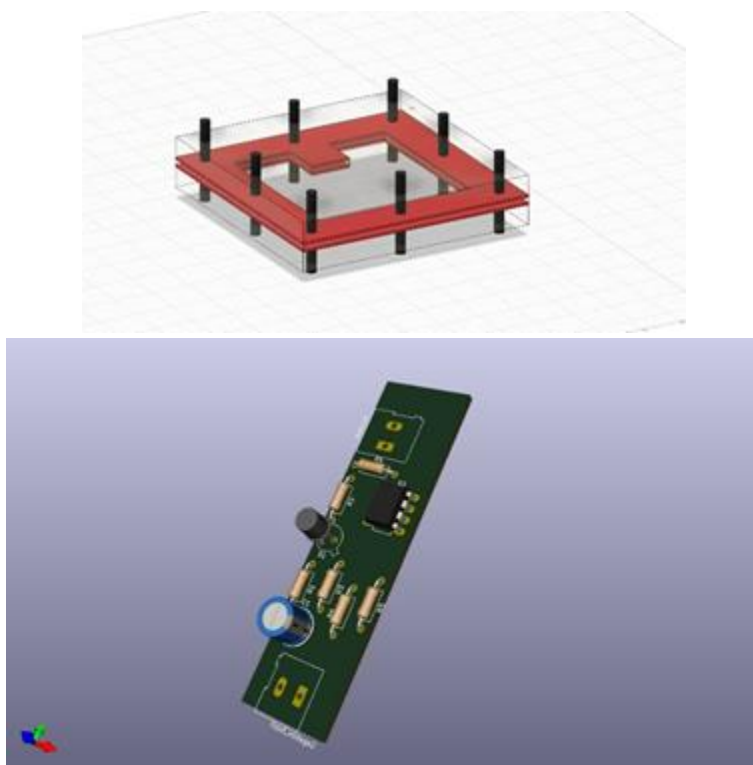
a) SOC light sensor flow cell configuration; b) Detector PCB layout
